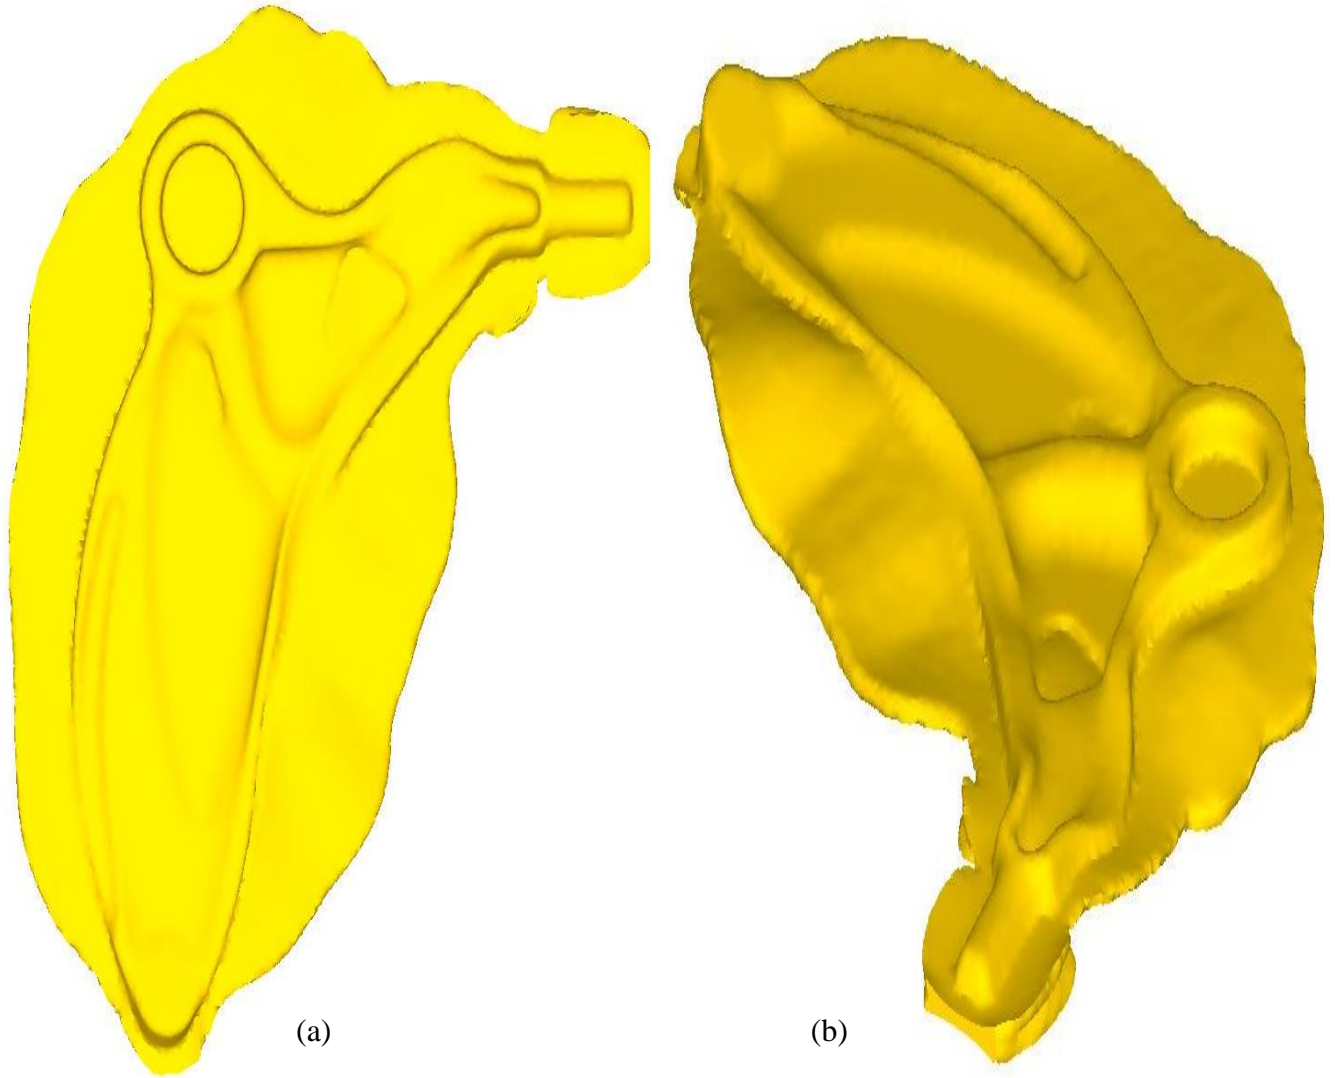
Forged shape for the flat plate billet - AZ80 @ 400 °C using 8 mm/sec, (a) front (b) back.
